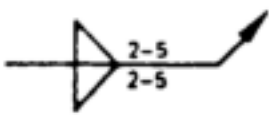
Dimensions of chain intermittent fillet welds.
